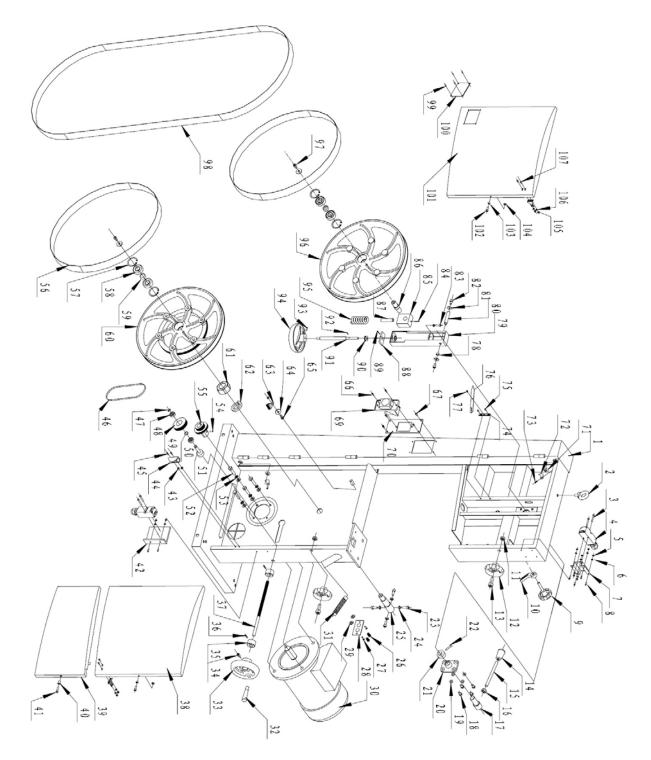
Spare parts drawing 1 - Wood Band Saw HBS 400
